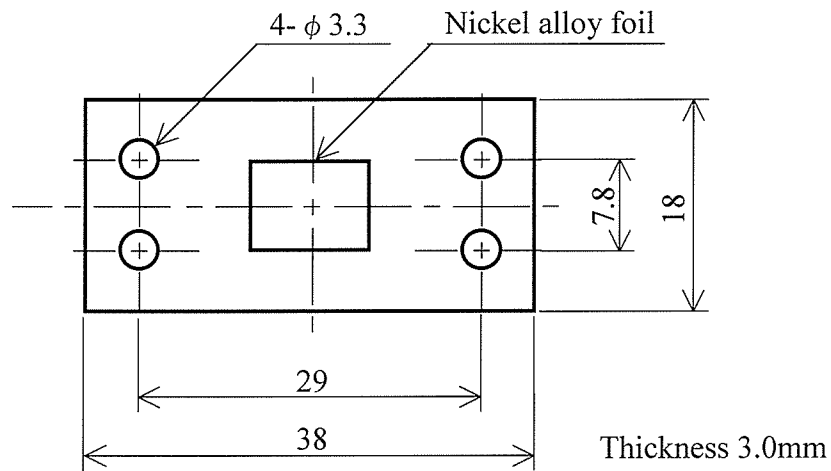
Geometry and dimensions of specimen for plane bending test
